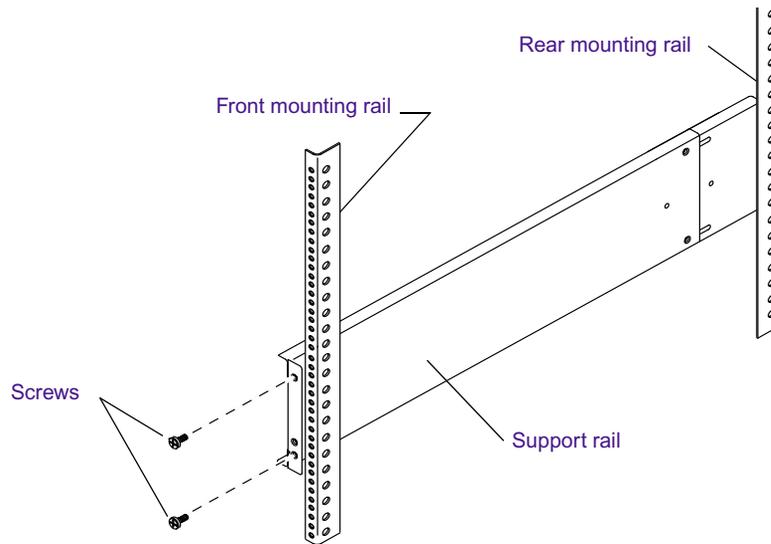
Attaching the MediaDock Ultra320 Rails to the Front Mounting Rails
